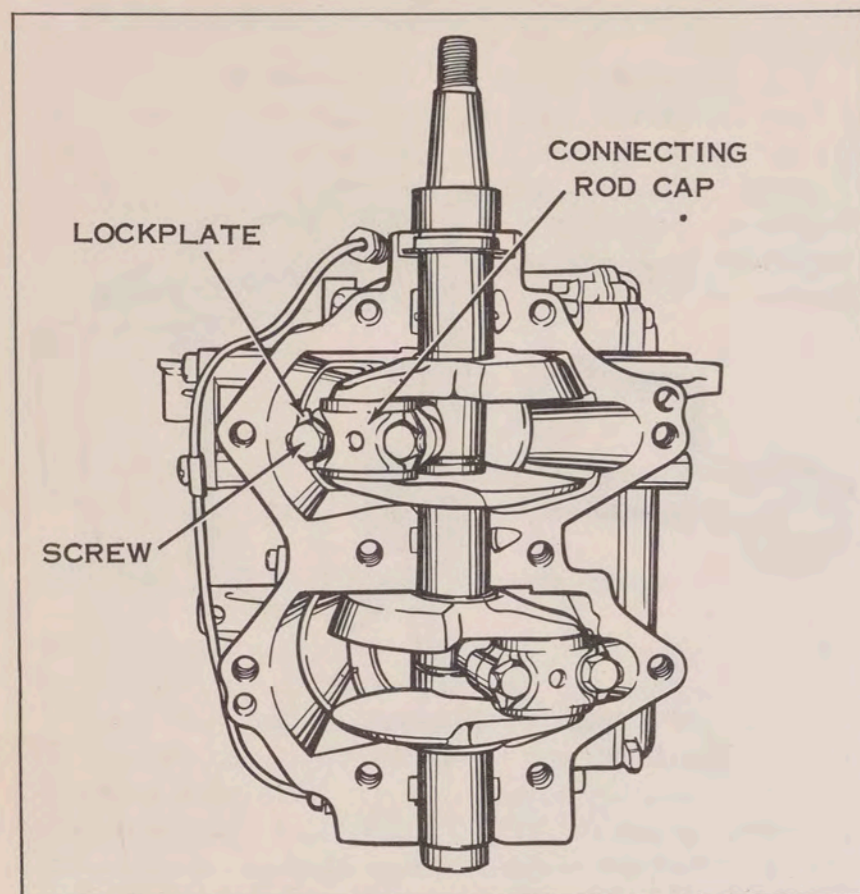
Hex Head Connecting Rod Screws with Lockplates
